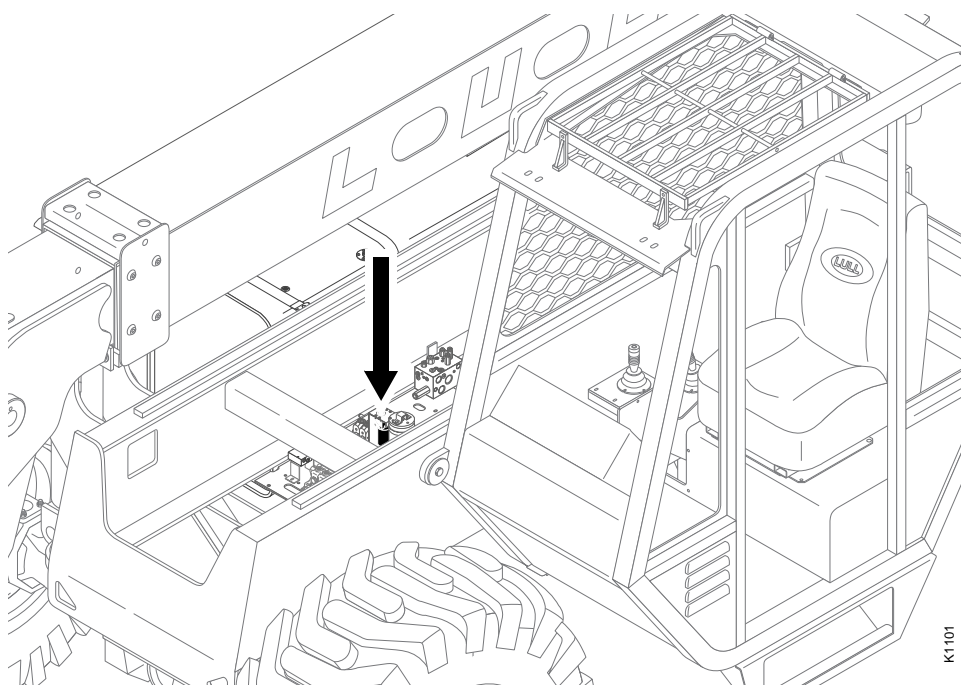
Hydraulic Pressure Filter – Control Manifold Hydraulics
